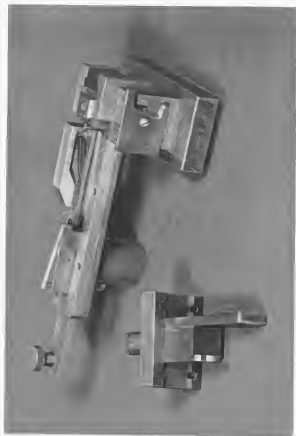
Slide feed carrier which is designed to lift the component and place it over locating pins.
